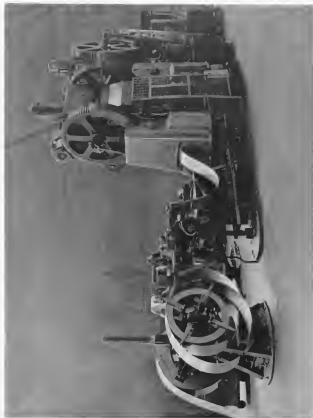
Coil holder with independent straightening roll feeding roll feed press.
